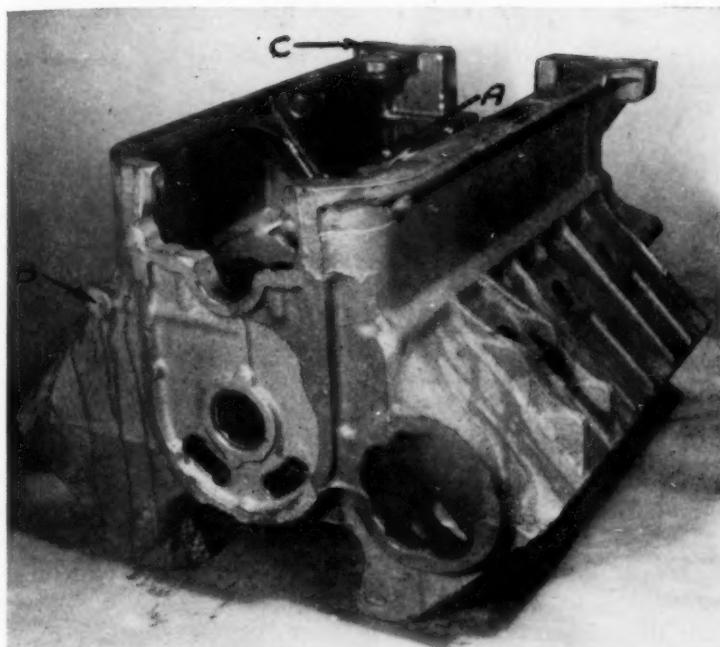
CASTING WHICH SHOWED DEFECTS AT POINTS A, B AND C IF CARBON EQUIVALENT AND POURING TEMPERATURE WERE NOT CLOSELY CONTROLLED.
